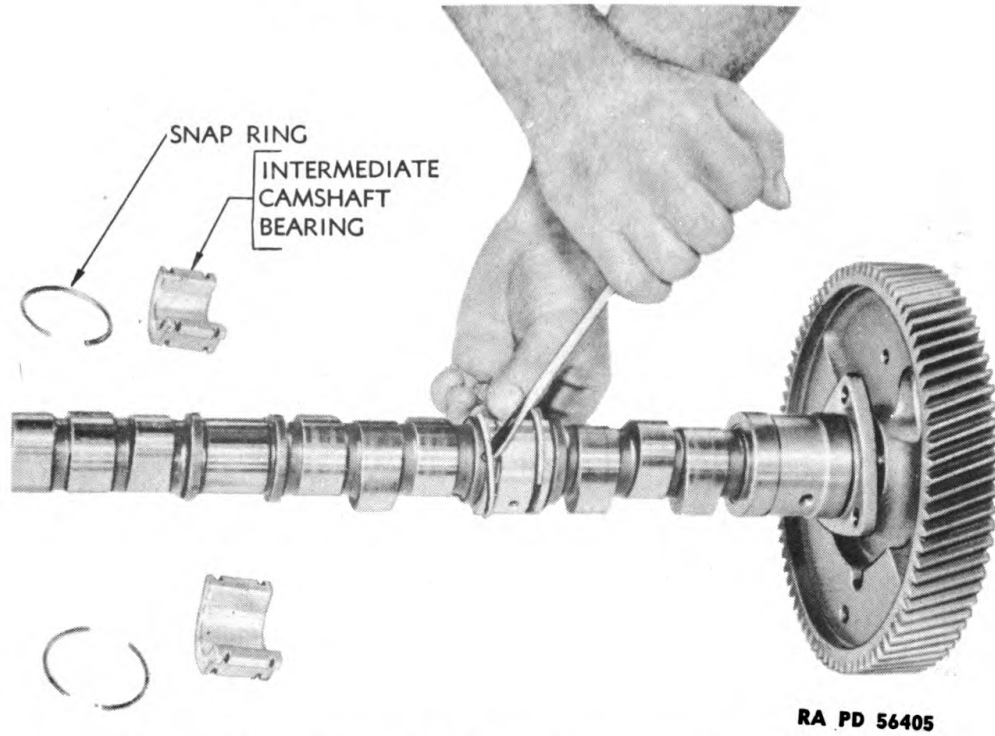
Removing Snap Ring from Camshaft Intermediate Bearing
